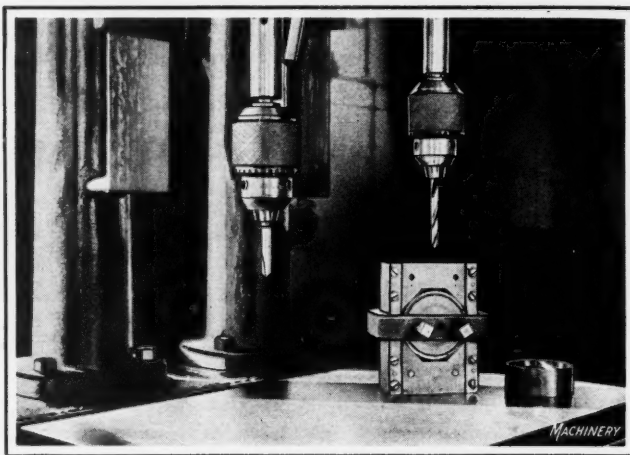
Drilling the Holes through which the Gage Spindle operates
